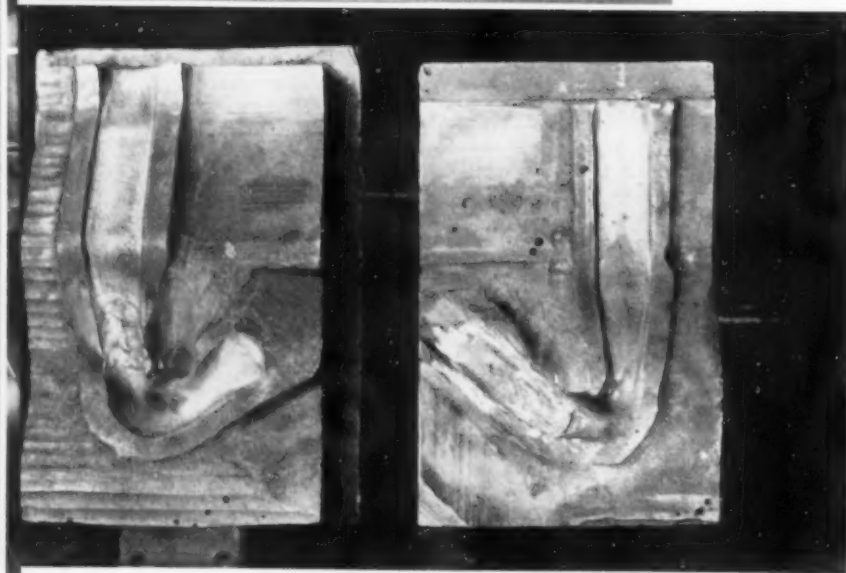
Finish forging die wear-proofed with a torch-welded nickel base hard facing alloy.
